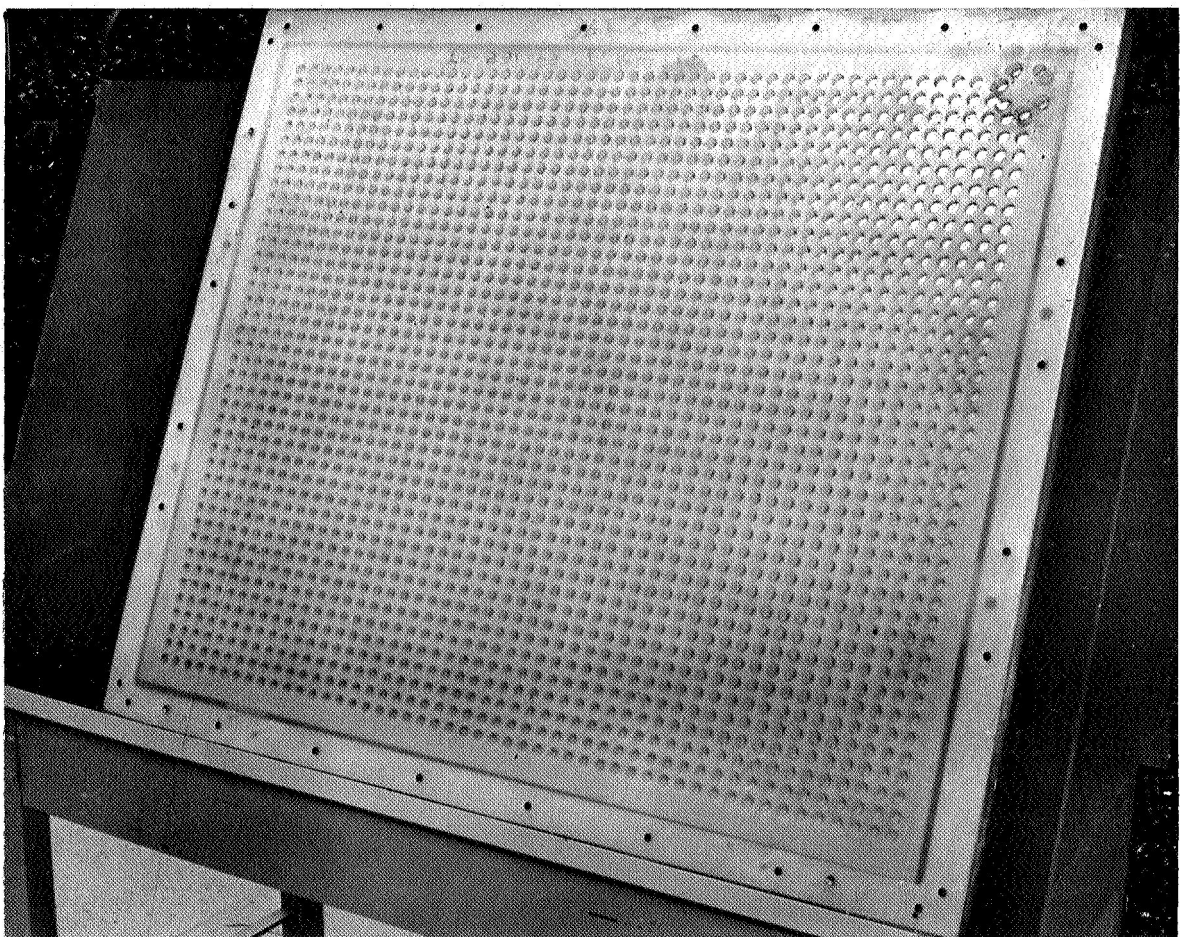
Vinyl Spot Welding Template, 40x49 in.
